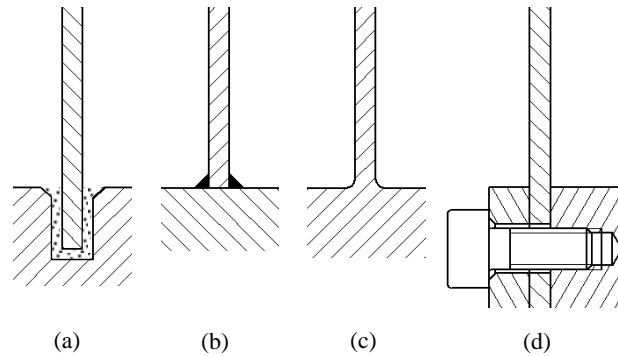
Possible methods of attaching the ends of the leaf-springs to the fixed and moving stages of the pivot: (a) glued within a slit; (b) brazed/welded; (c) monolithic construction; (d) bolted/clamped.
